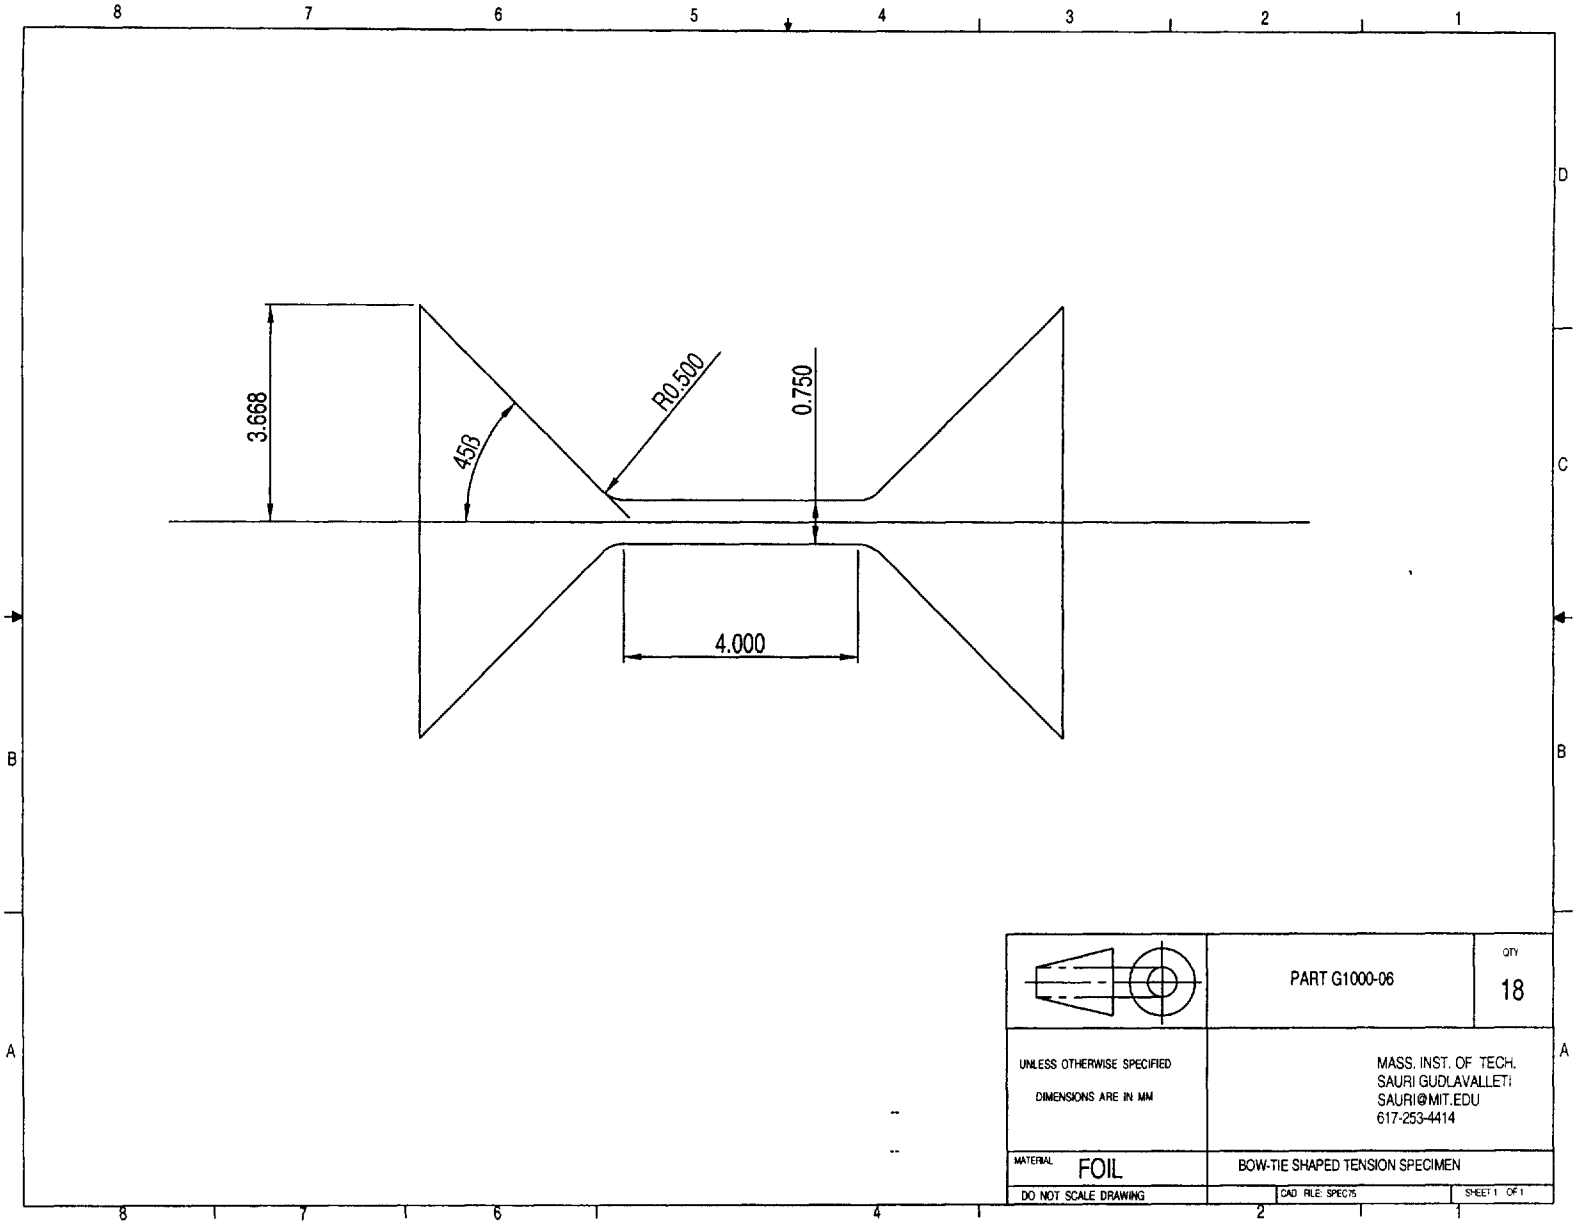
Bow-tie shaped tensile specimen geometry for use with grips shown in Fig. 4-4. This specimen geometry was found to be unsuccessful because it promoted failure at the ends of the gage section which have a small fillet radius.
